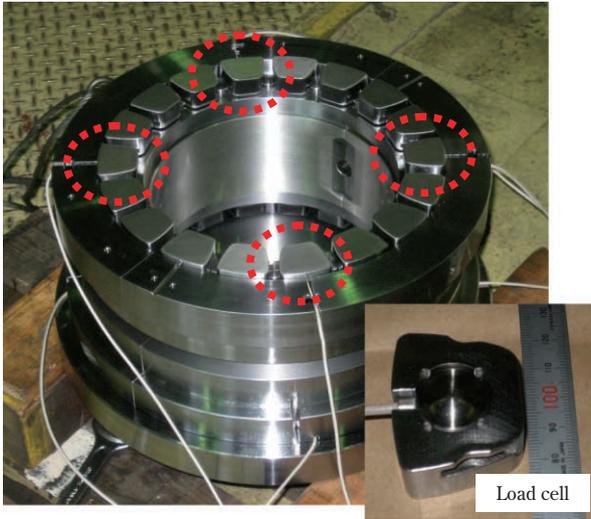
Thrust bearing with load cell (for measurement of gas thrust force)
